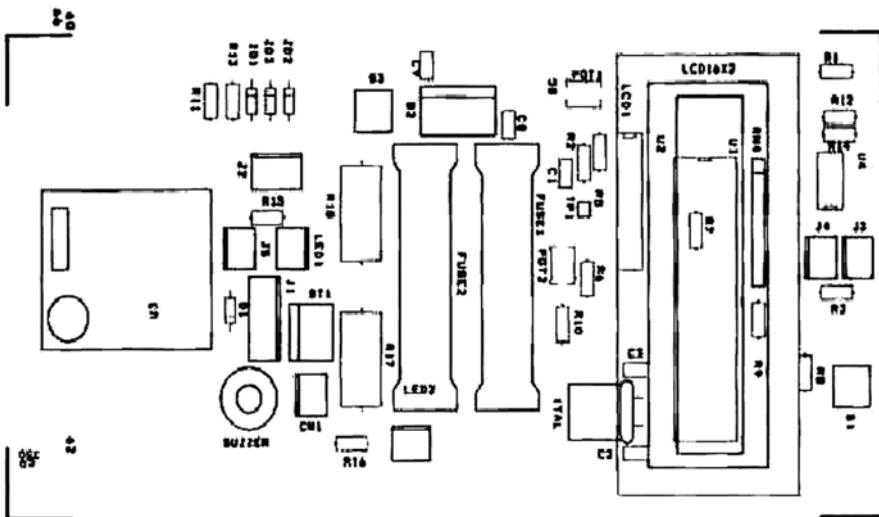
PCB component (top) layout of RFID and sensor unit of CO-monitoring device
